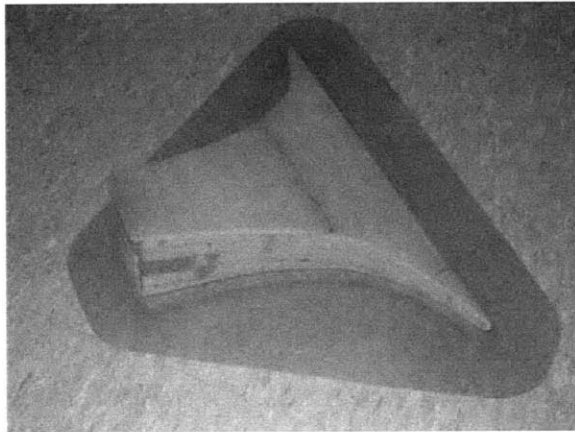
The mold which would be used to make the chamber or hood that would be used to divert the square flow from the blower to a much wider flat flow that would cover a wider area on the hood. A flat board was attached to the bottom in order to get the mold to come out in a design that can be seen in Figure 10.
